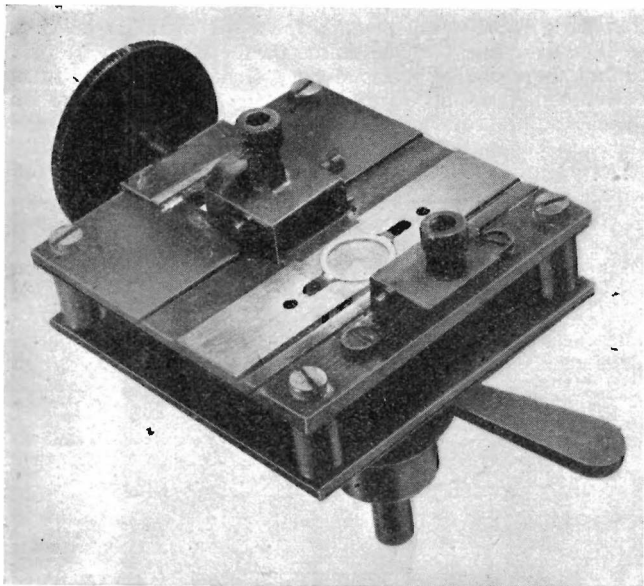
Wire mesh held taut in the welding jig over the ring frame
